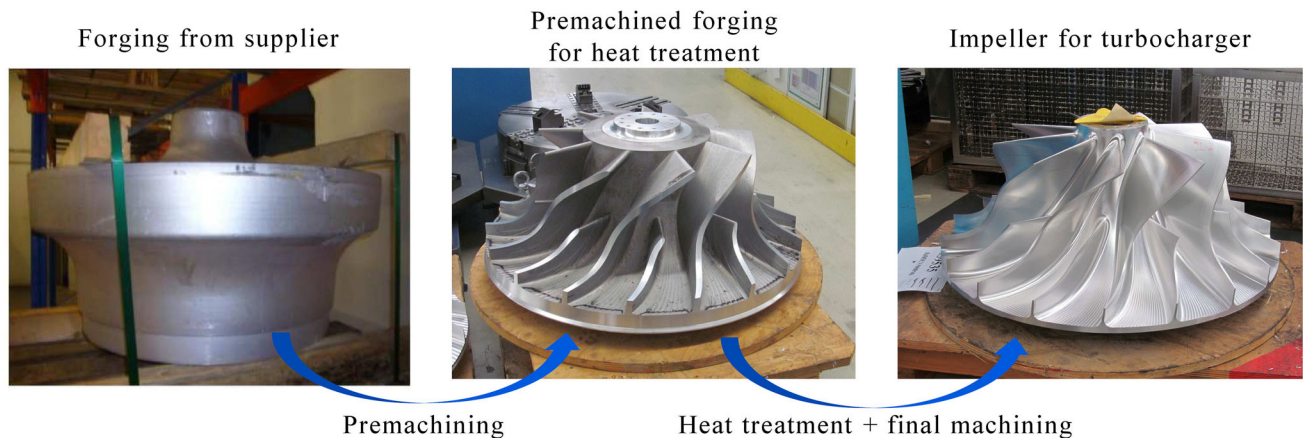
Manufacturing steps for a large compressor impeller in turbochargers. Small impellers are machined directly from the heat treated forging, i.e., without pre-machining (courtesy of ABB Turbo Systems Ltd).
